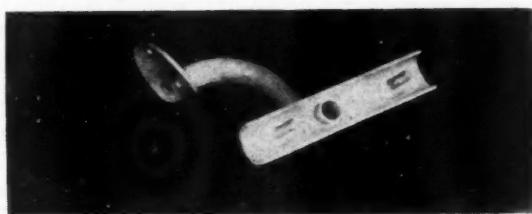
The cowl lamp bracket fabricated by silver soldering
